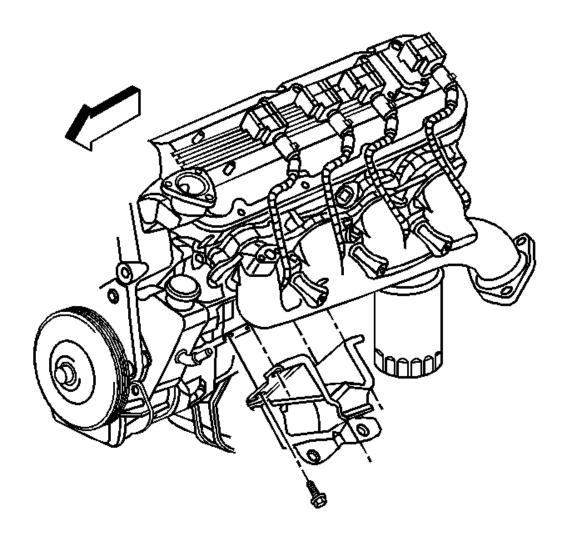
View Of Engine Mount-To-Engine Bolts & Engine Mount Courtesy of GENERAL MOTORS CORP.
